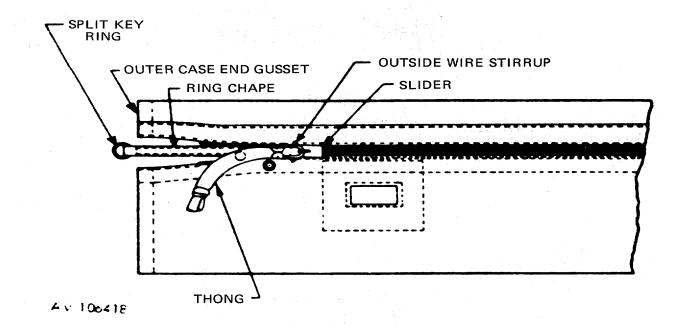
Ring chape installed on kit outer case slide interlocking fastener
